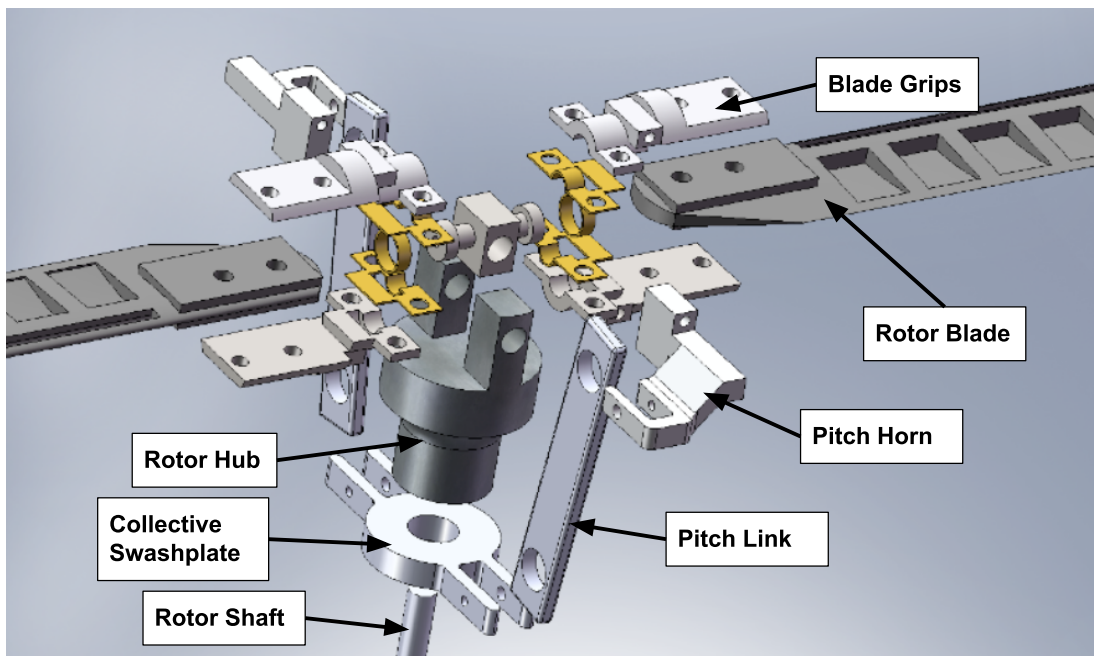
Exploded view diagram of the rotor hub used during the experiment.
